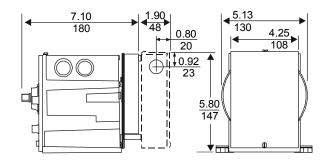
Spring Return with Switch Kit Dimensions, in. (mm)
